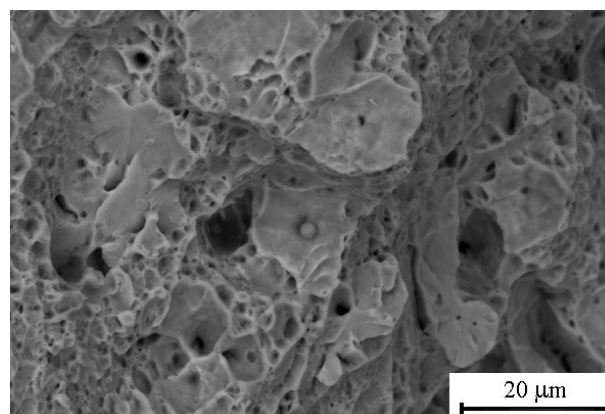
Local view from Figure 16 on the ductile fracture surface (Figure 16); complex carbide in the pit of the ductile failure
